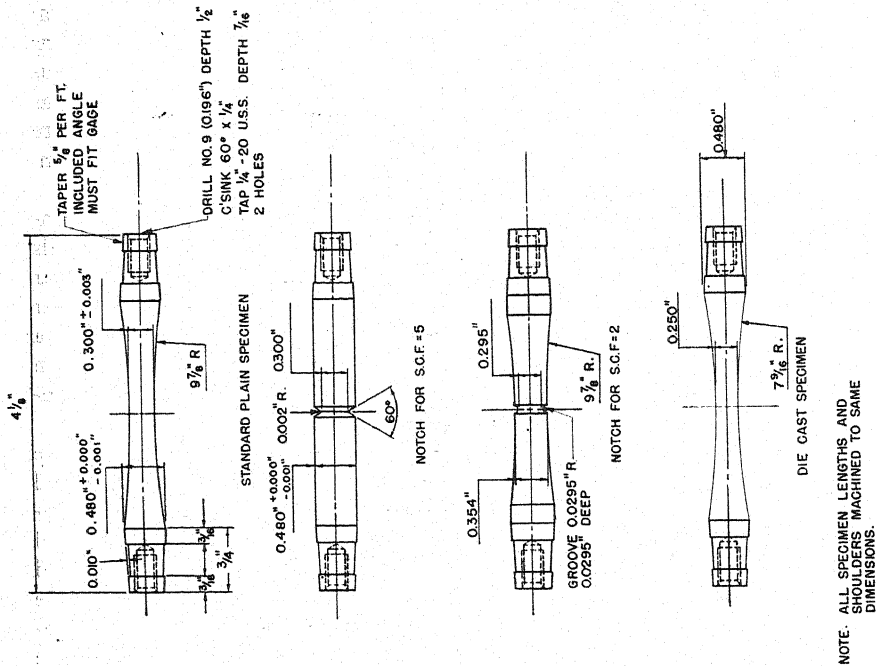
Dimensions of the Specimens Used for Rotating-Beam Fatigue Tests.
